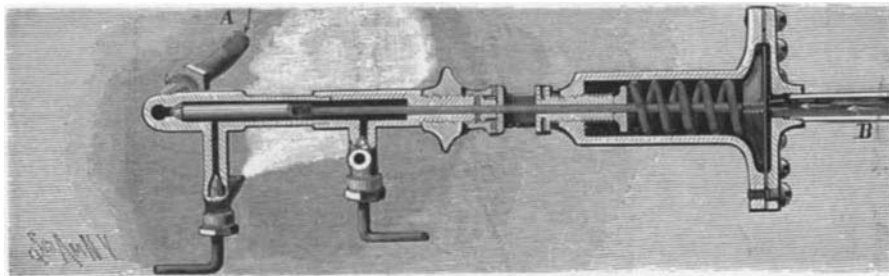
SECTIONAL VIEW OF AUTOMATIC REGULATOR.
